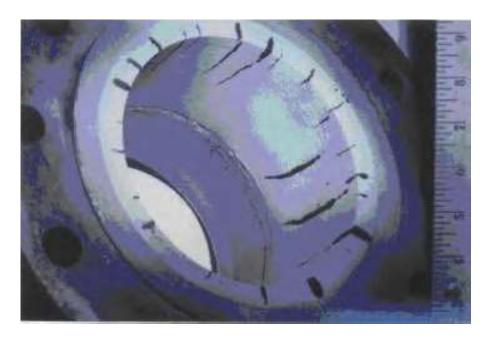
PT inspection of a Type 304 stainless steel catalyst withdrawal line piping and weld neck flange.
